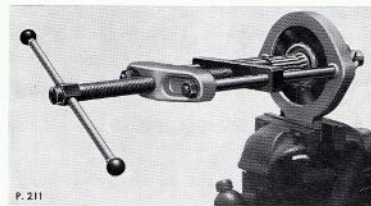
Withdrawing the inner bearing cone from the bevel pinion, using the Churchill Tool R.G.4221B and the adaptor set R.G.4221B-13
